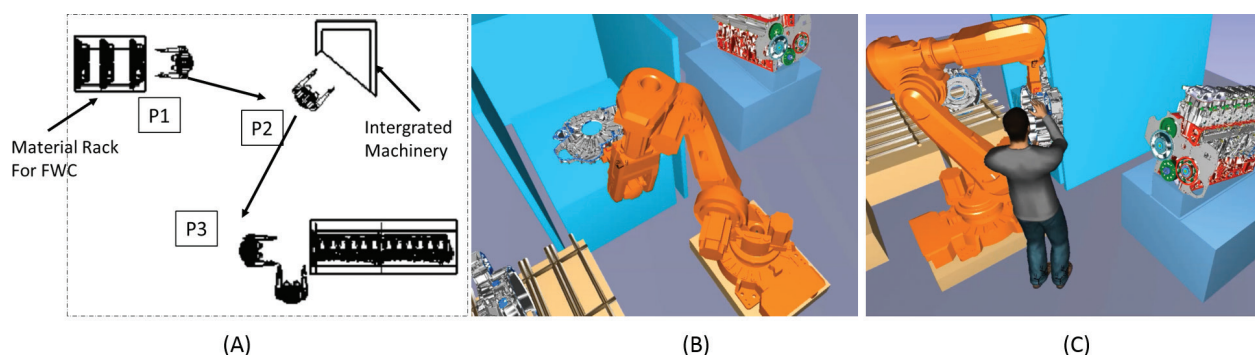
(A) Shows the manual workstation where several operators work together to assemble flywheel housing covers (FWC) on the engine block. (B) Shows the robot placing the FWC on the integrated machinery. (C) Shows the robot being hand-guided by an operator thereby reducing the ergonomic effort to position the flywheel housing cover on the engine block.
